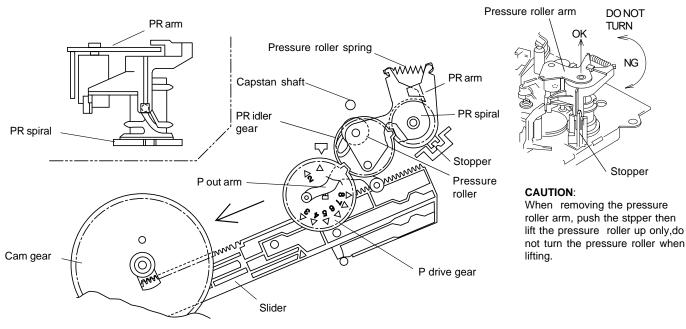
Pressure Roller Drive Mechanism (Top View)
